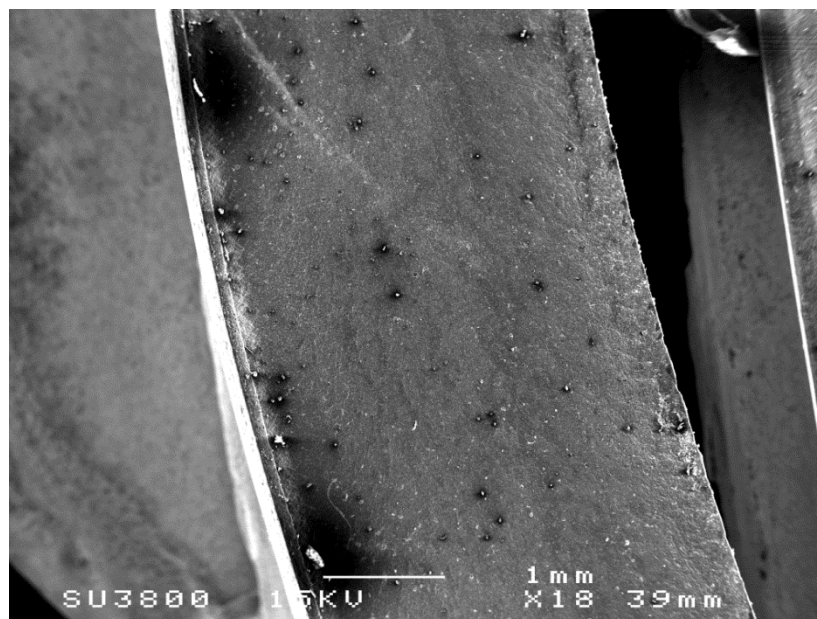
An SEM image of fractured Teesele™ containing debris on the fractured surface and a tear line running along the edge of the seal.
